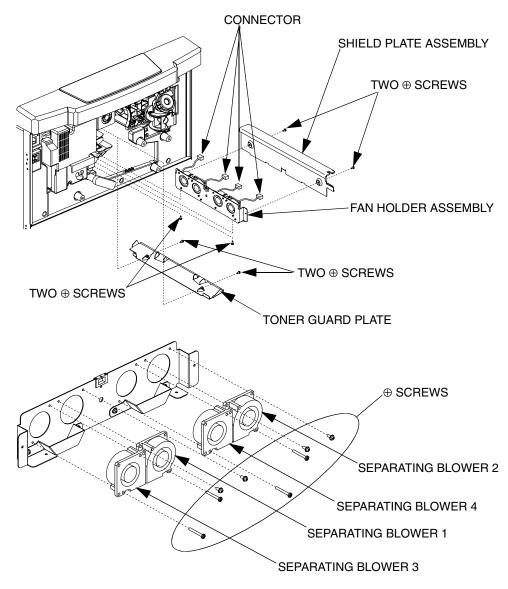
Removal of the Separating Blower 1, 2, 3, 4
